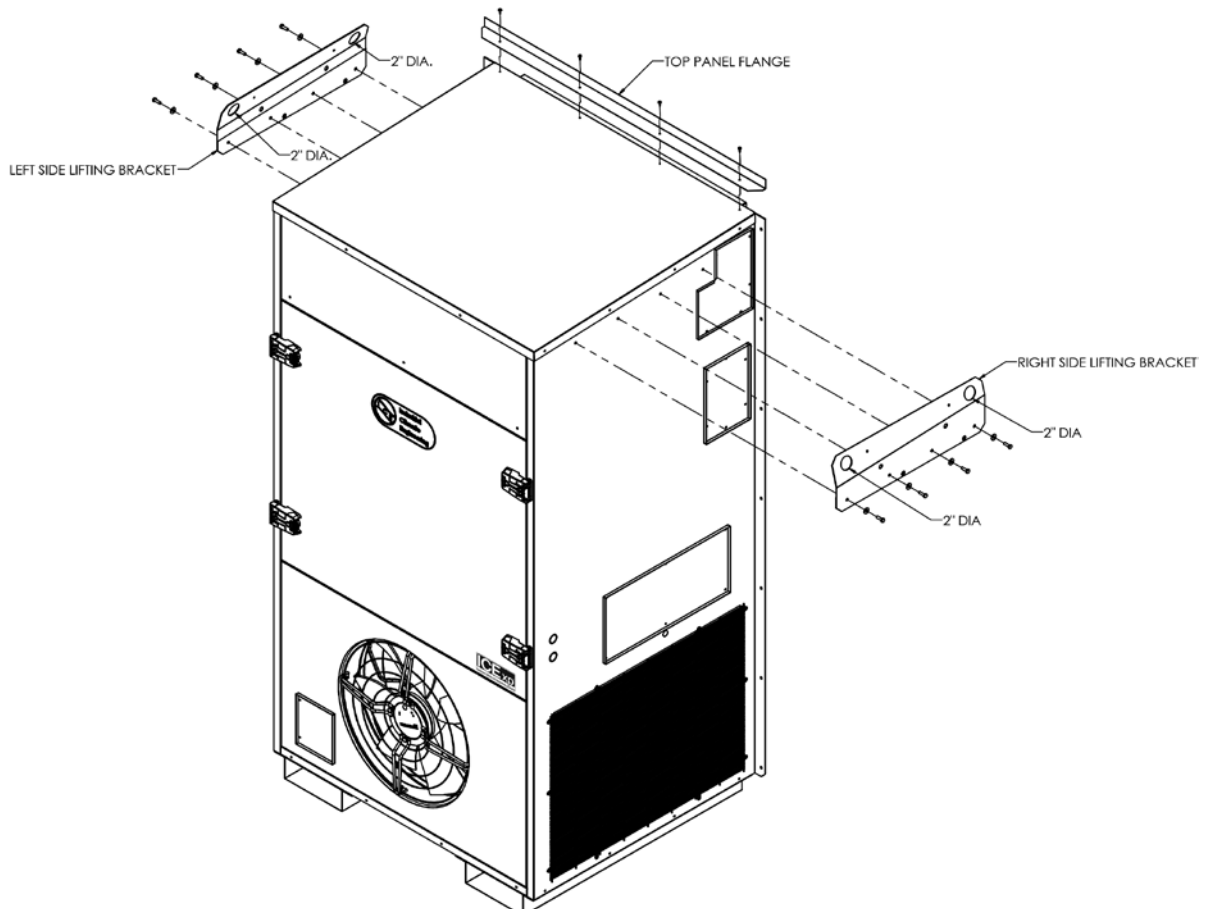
Top Flange and Lifting Bracket Installation (Typical)
